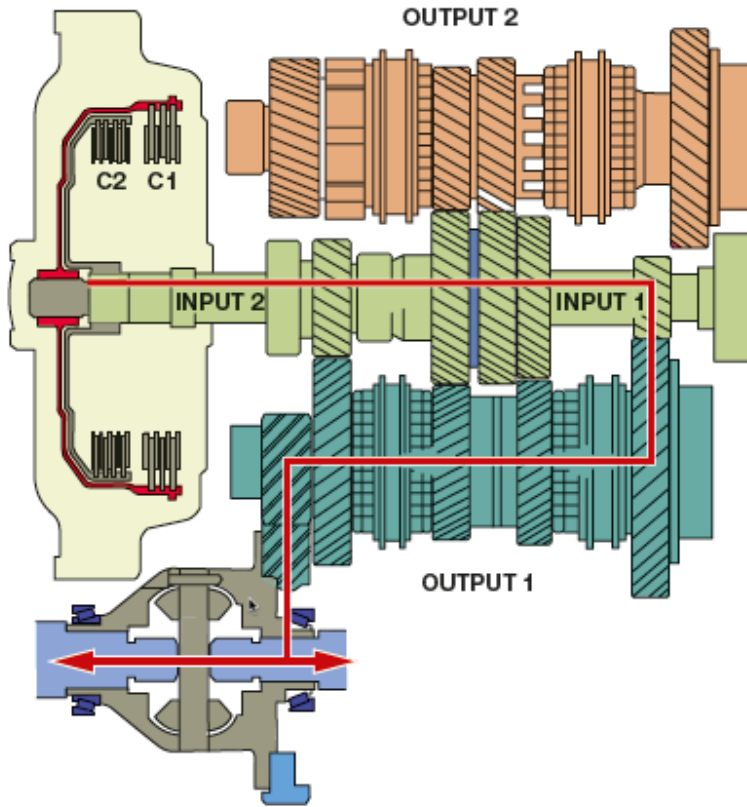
A dual clutch transmission, showing power flow in first gear, clutch 1 (C1) engaged.
